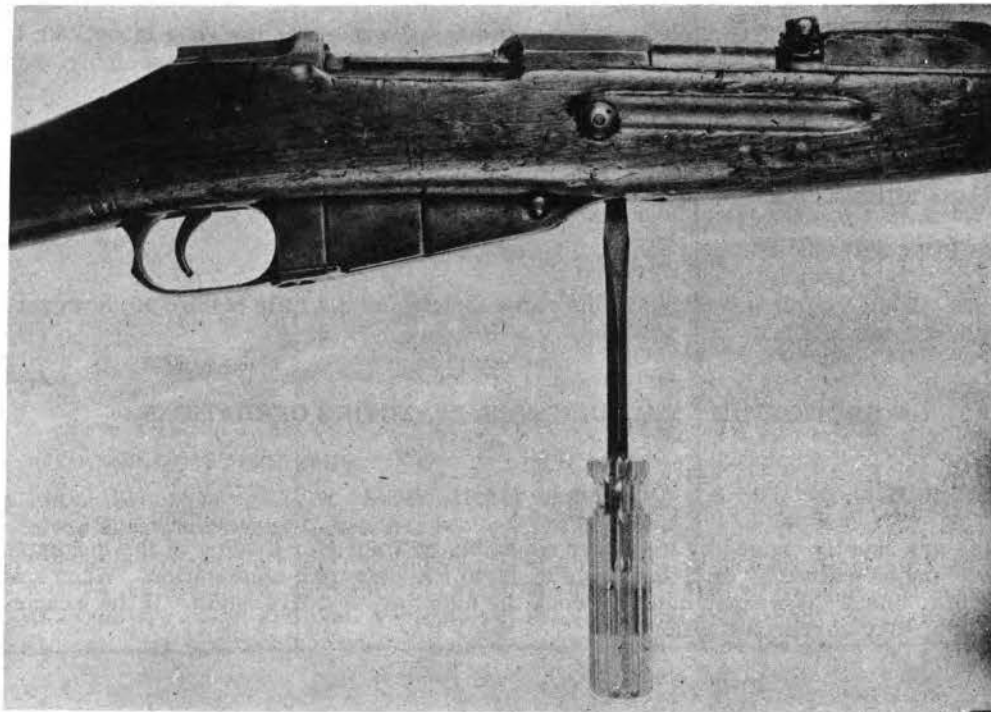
REMOVING THE FRONT TRIGGER GUARD SCREW.
